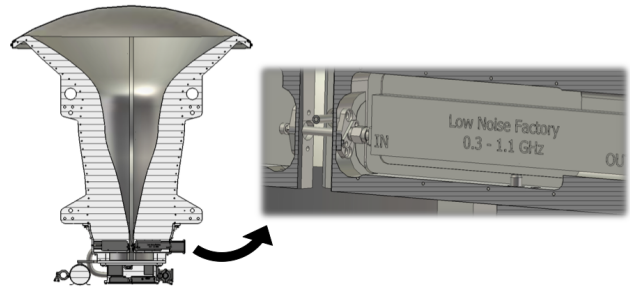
Cross-section view of the SKA Band 1 feed package.
